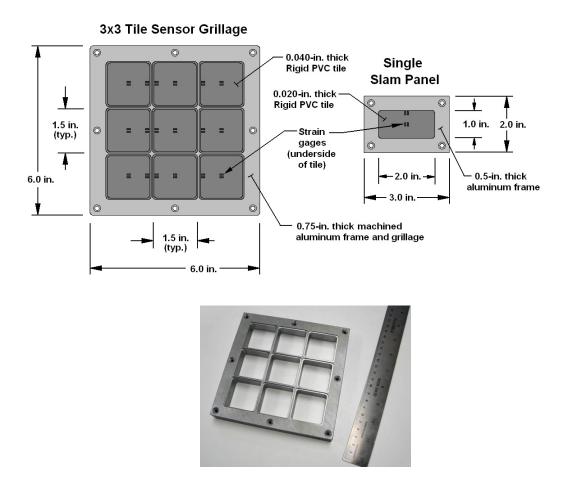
JHSS Slam Grillage and Slam Panel Configuration Details
